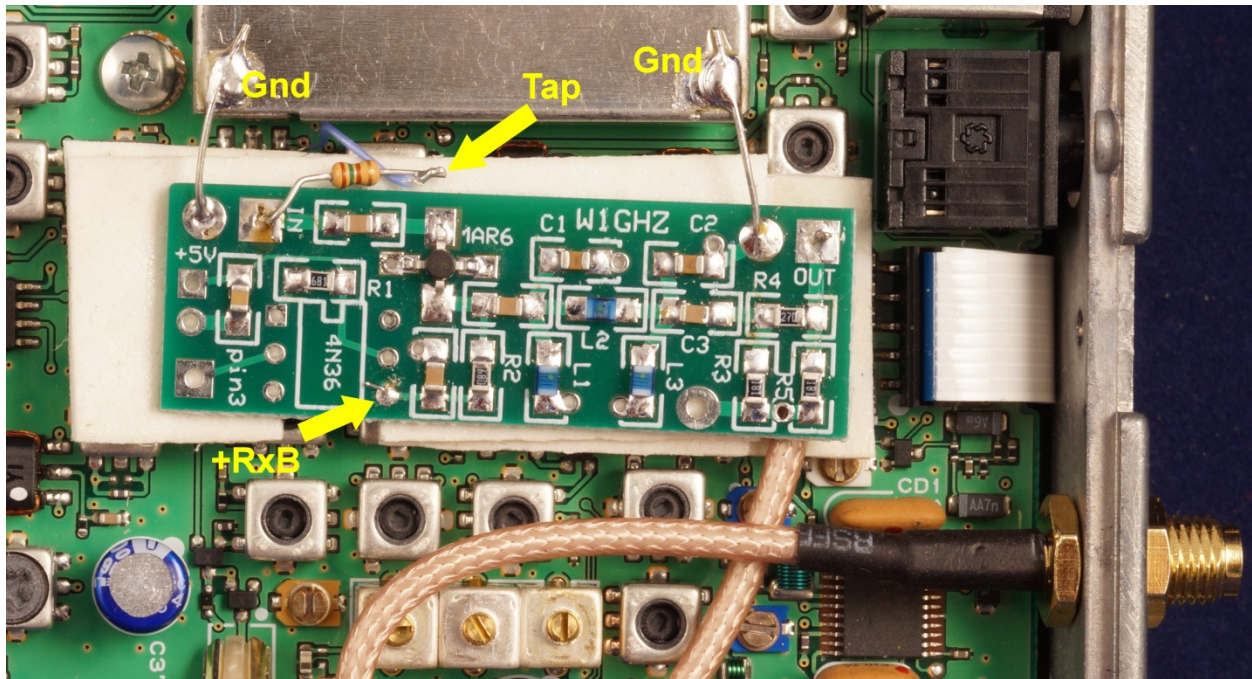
Low-cost Panadapter prototype PC board installed in FT-817
